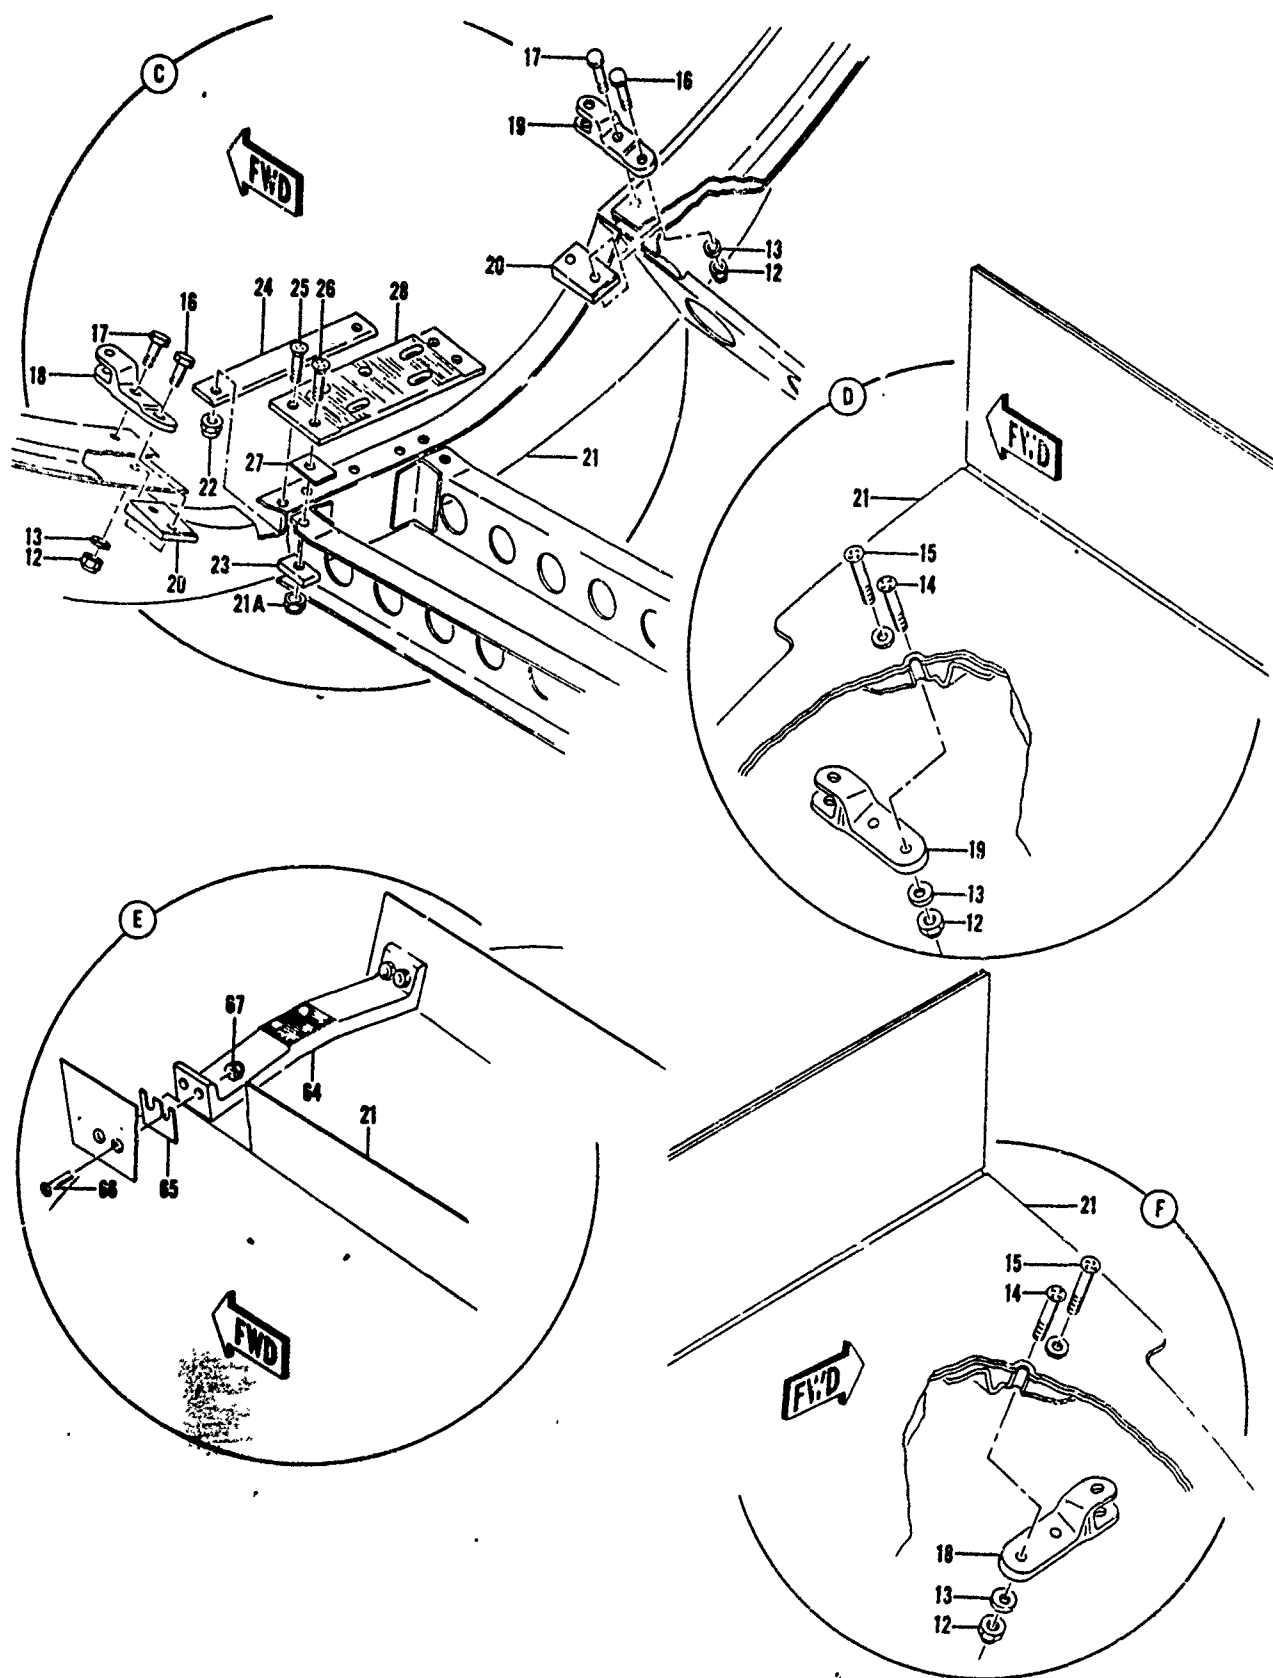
Aft Thrust Reverser and Sleeve Assembly (Sheet 2 of 3)
